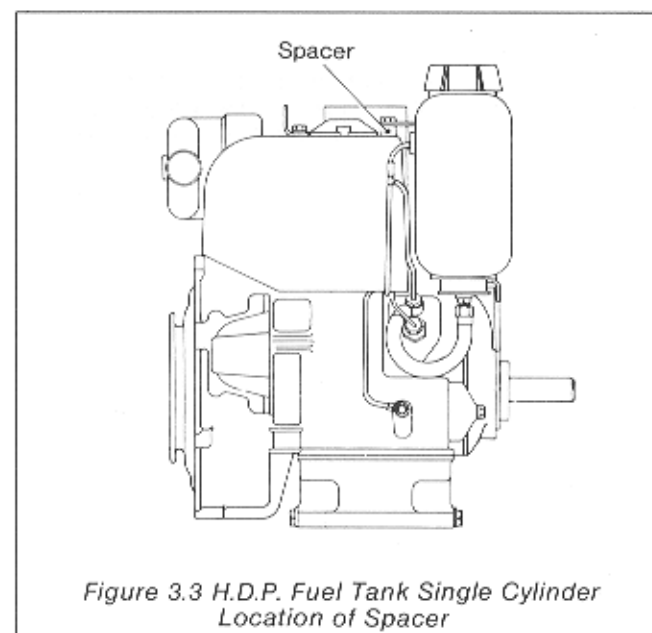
H.D.P. Fuel Tank Single Cylinder Location of Spacer
